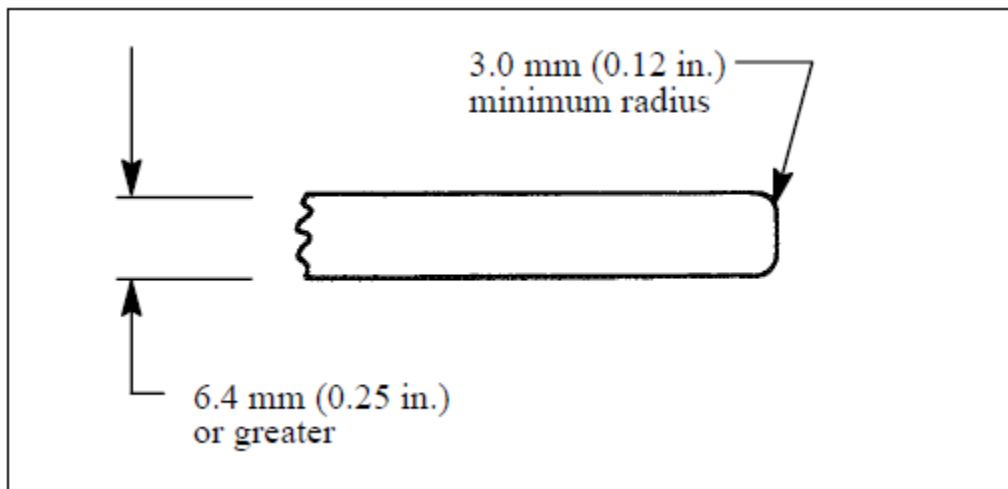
REQUIREMENTS FOR ROUNDING EXPOSED EDGES 0.25 INCH (6.4 MM) THICK OR THICKER
